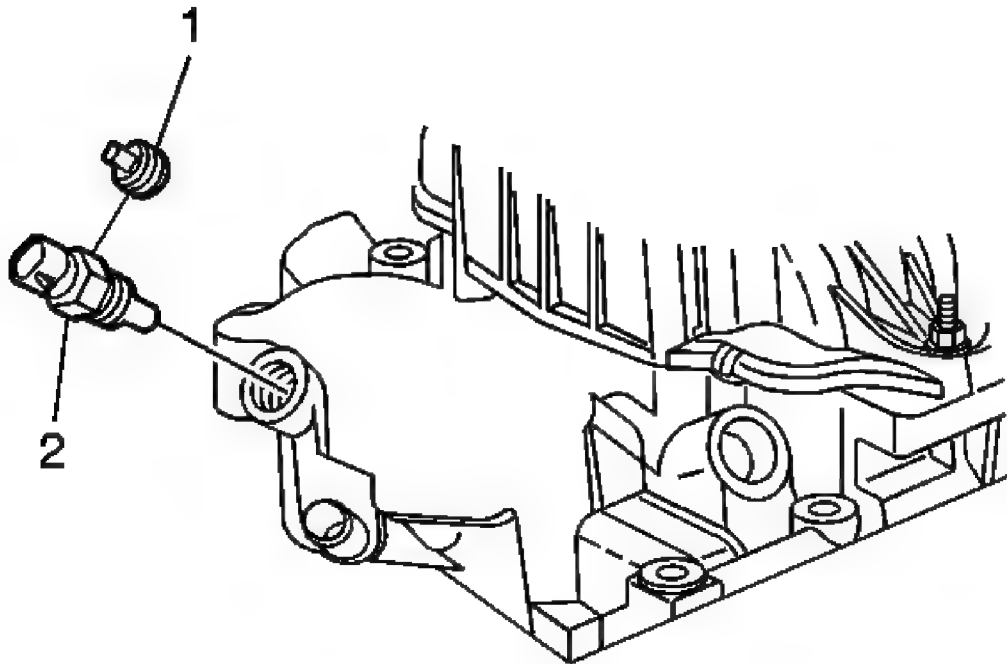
View Of Engine Coolant Temperature Sensor Plug Or ECT Sensor
